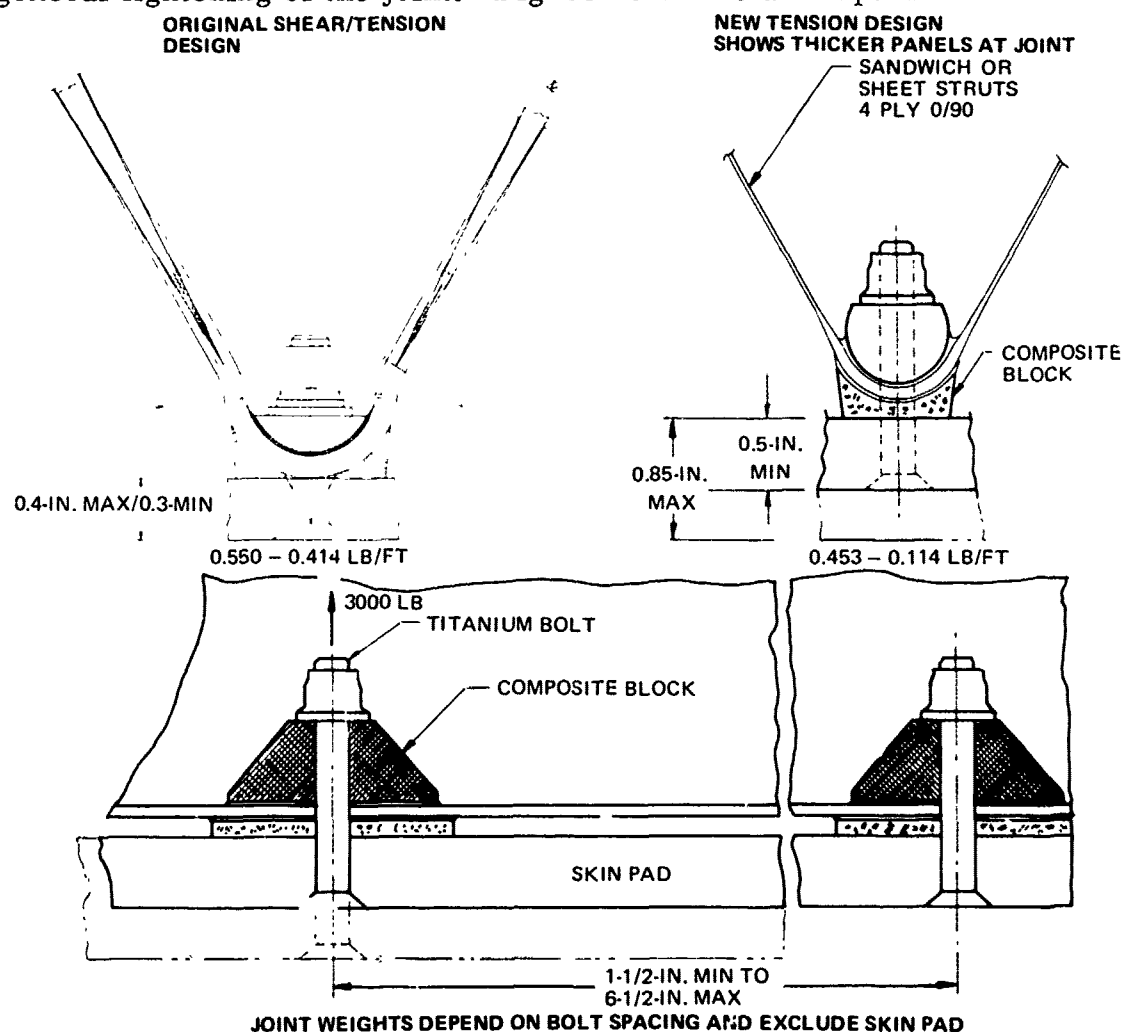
BOLTED JOINT DESIGN IMPROVEMENT
